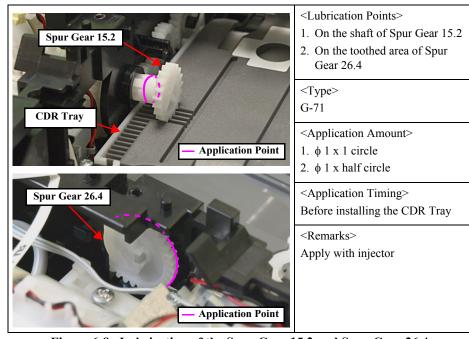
Lubrication of the Spur Gear 15.2 and Spur Gear 26.4
